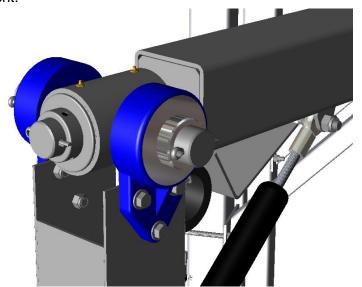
Bearing Attached to the End of the Arm Weldment
